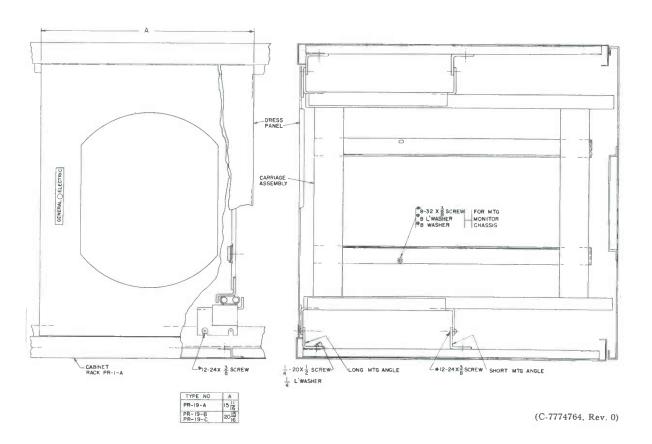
Installation Drawing, Rack Mounting Kits, Types PR-19-A, PR-19-B, PR-19-C
